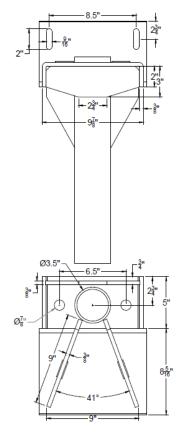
BRACKET (BACK AND TOP VIEW)
